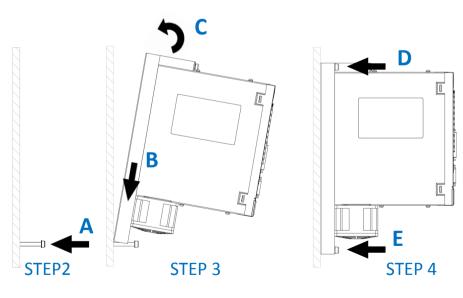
Mechanical Mounting of AMD2000 D2015 Servo Drive
